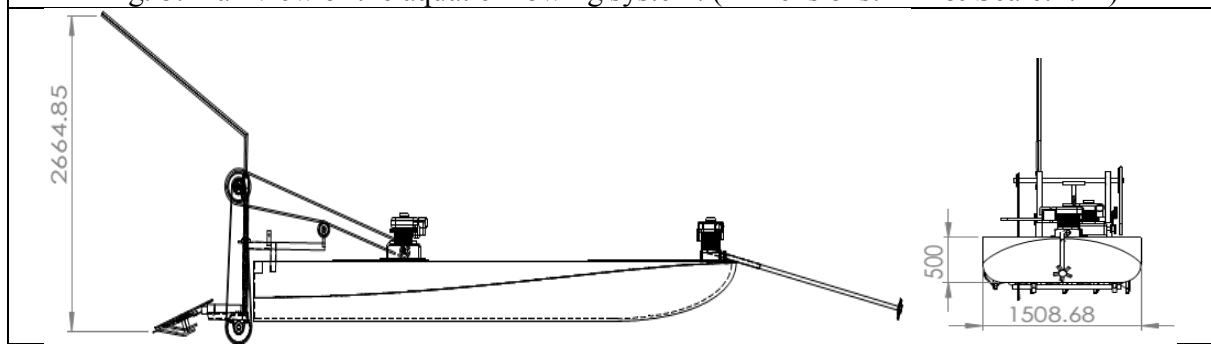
Side and rear views of the aquatic mowing system. (Dimensions: mm & Scale:1:11)
